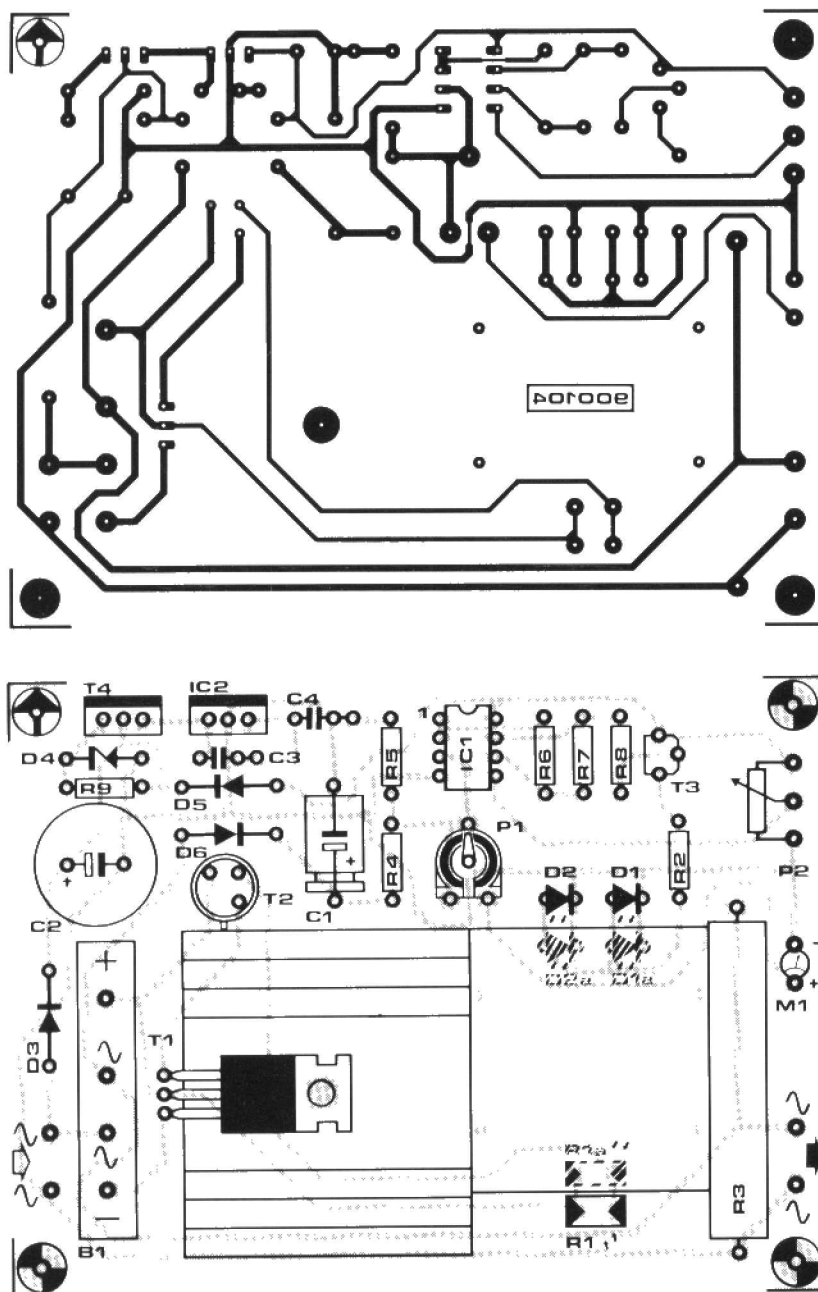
Single-sided printed circuit board for the a.c. power supply.
